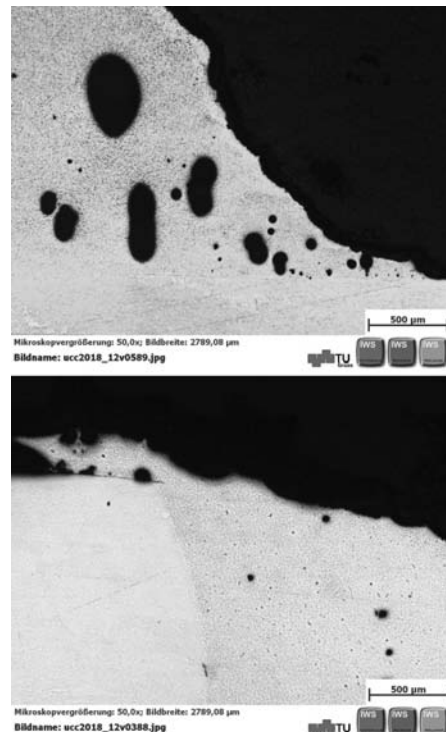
Welded AZ31 joint, grinded – AM50 weld metal details/corrosion after the 240 h NSS test: a) lower weld seam; b) upper weld seam
